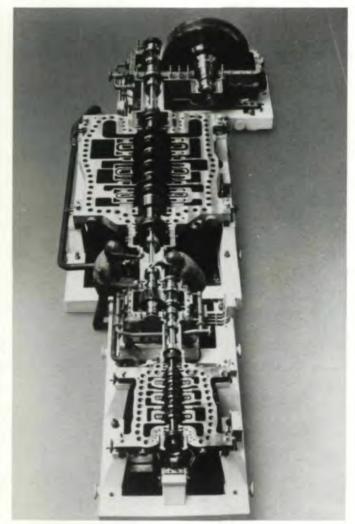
Total view of a high- and low-pressure gas compressor unit equipped with high speed gears, Ref. Nos. 2 and 3.
